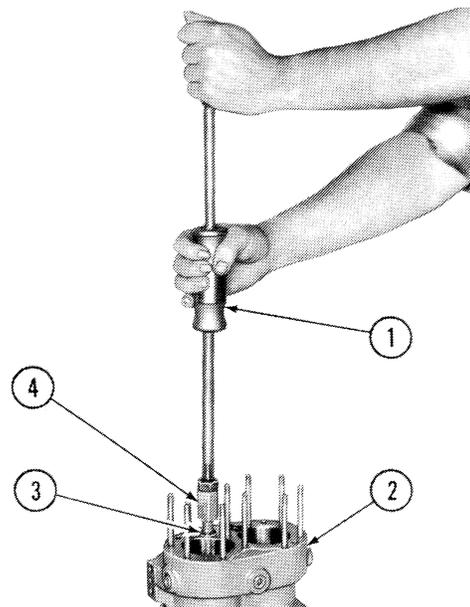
REMOVING INLET VALVE SEAT FROM CYLINDER BLOCK T-28932
